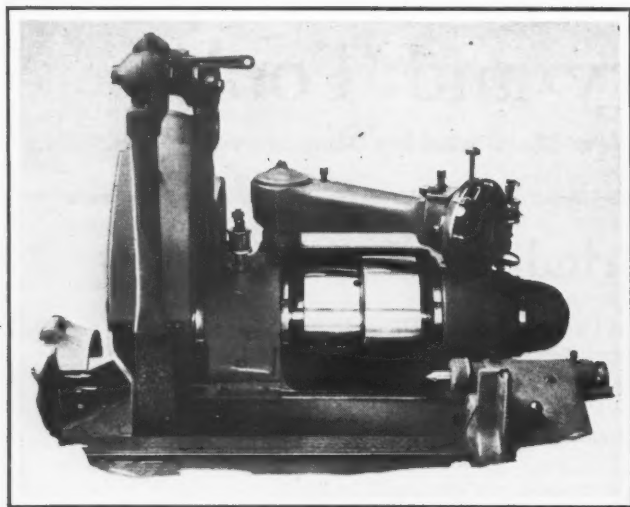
Grinding Wheel Head with Pulley Guard removed
